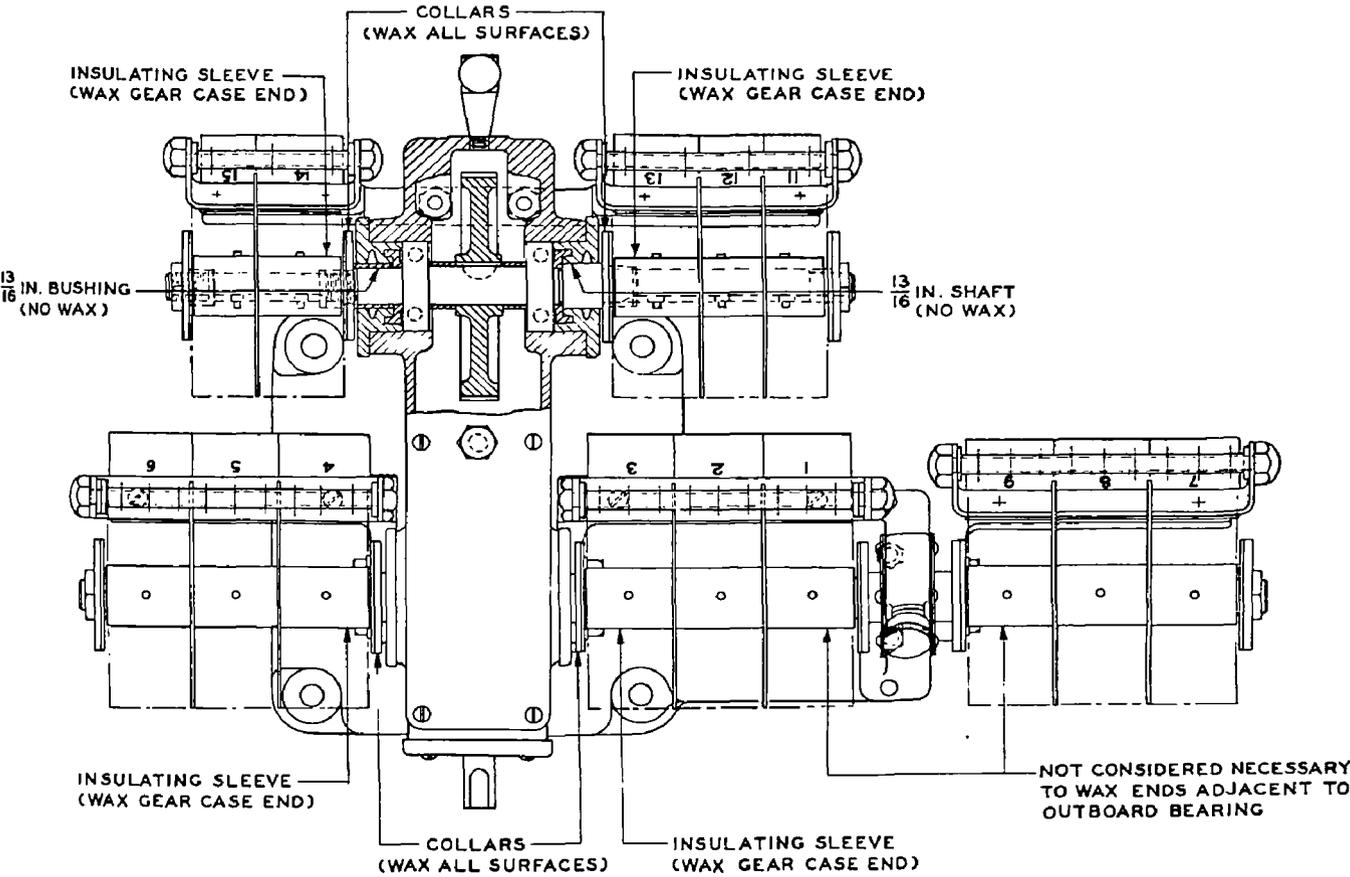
Parts To Be Waxed To Stop Oil Creepage (2C Interrupter Mounting Shown)
